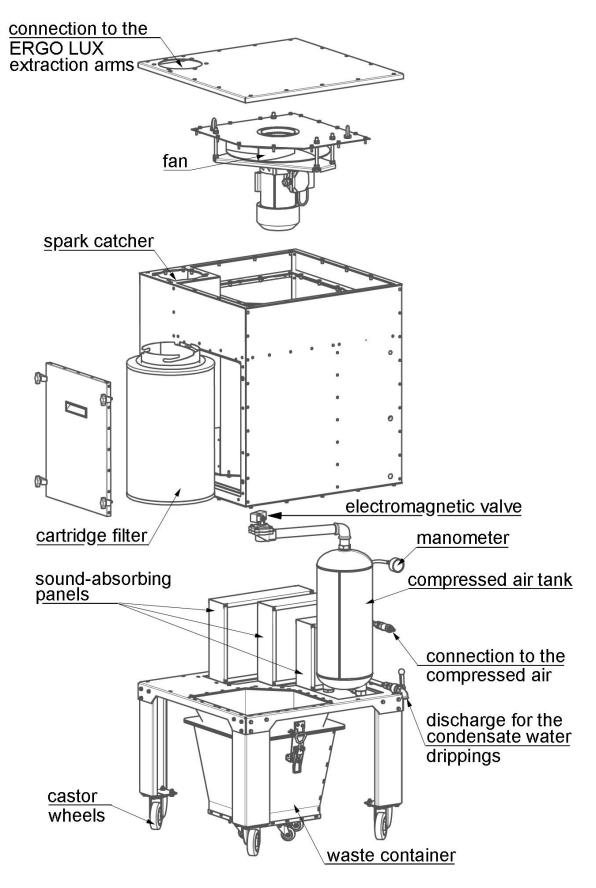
Structure of the filtering unit BIG-1000-R
